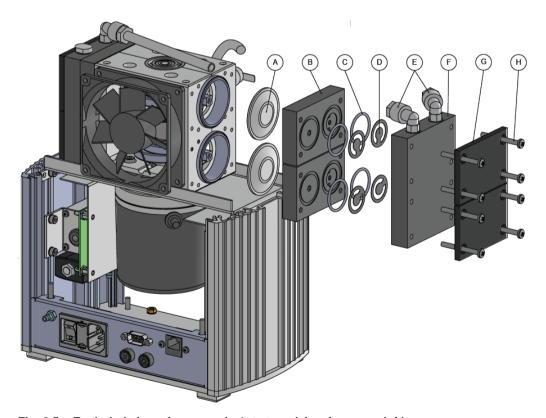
Exploded view of pump unit, 1st stage (view from rear left)
